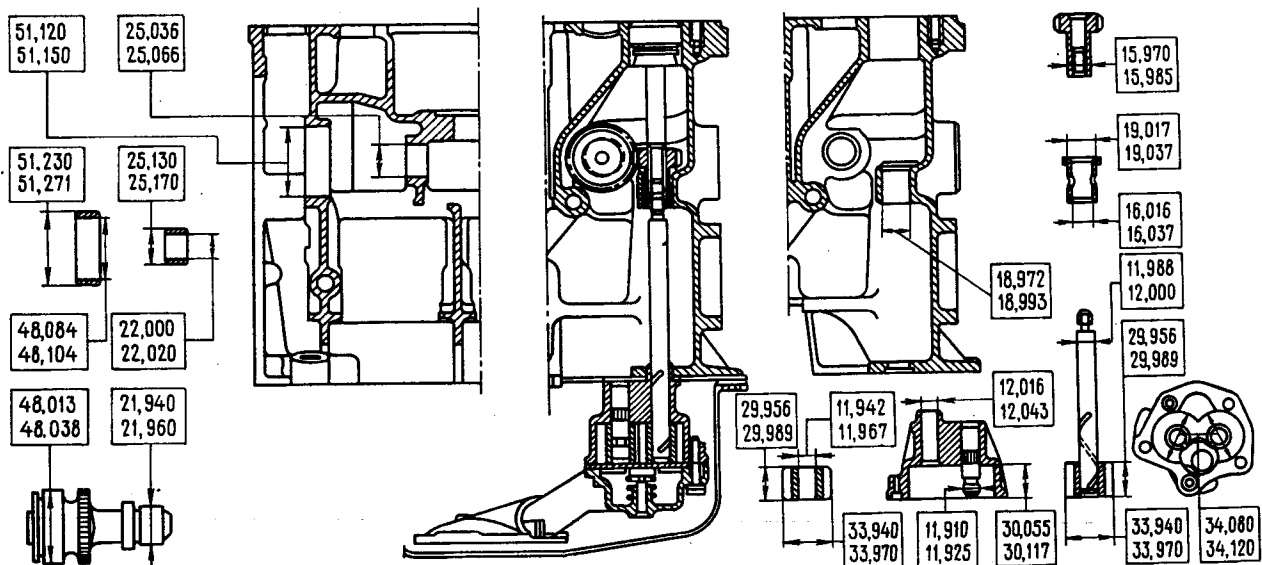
Basic Dimensions of Oil Pump and Drive
